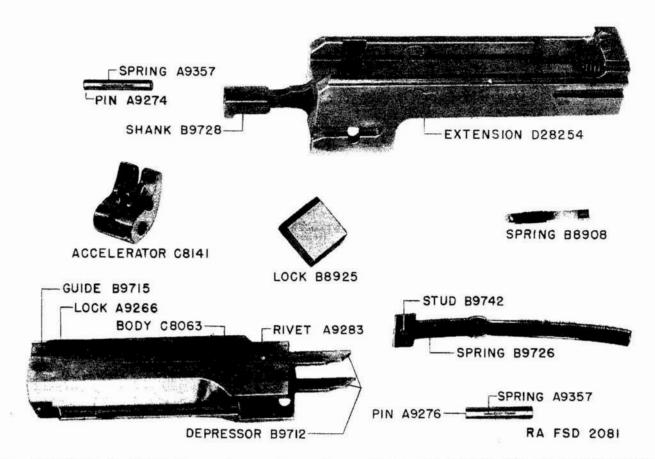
BROWNING MACHINE GUN, CAL. .50, M2, AIRCRAFT - BARREL EXTENSION AND OIL BUFFER GROUP - PARTS
